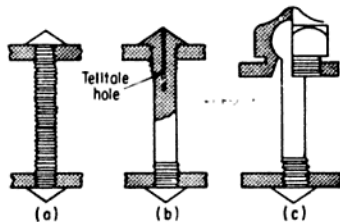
Types of stay bolts, with and without a telltale hole.
